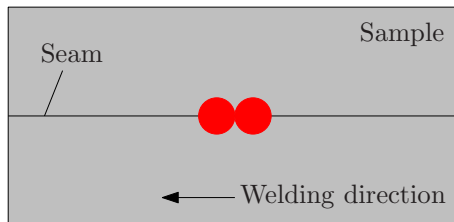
Laser spot placement in the serial twin spot welding configuration.
